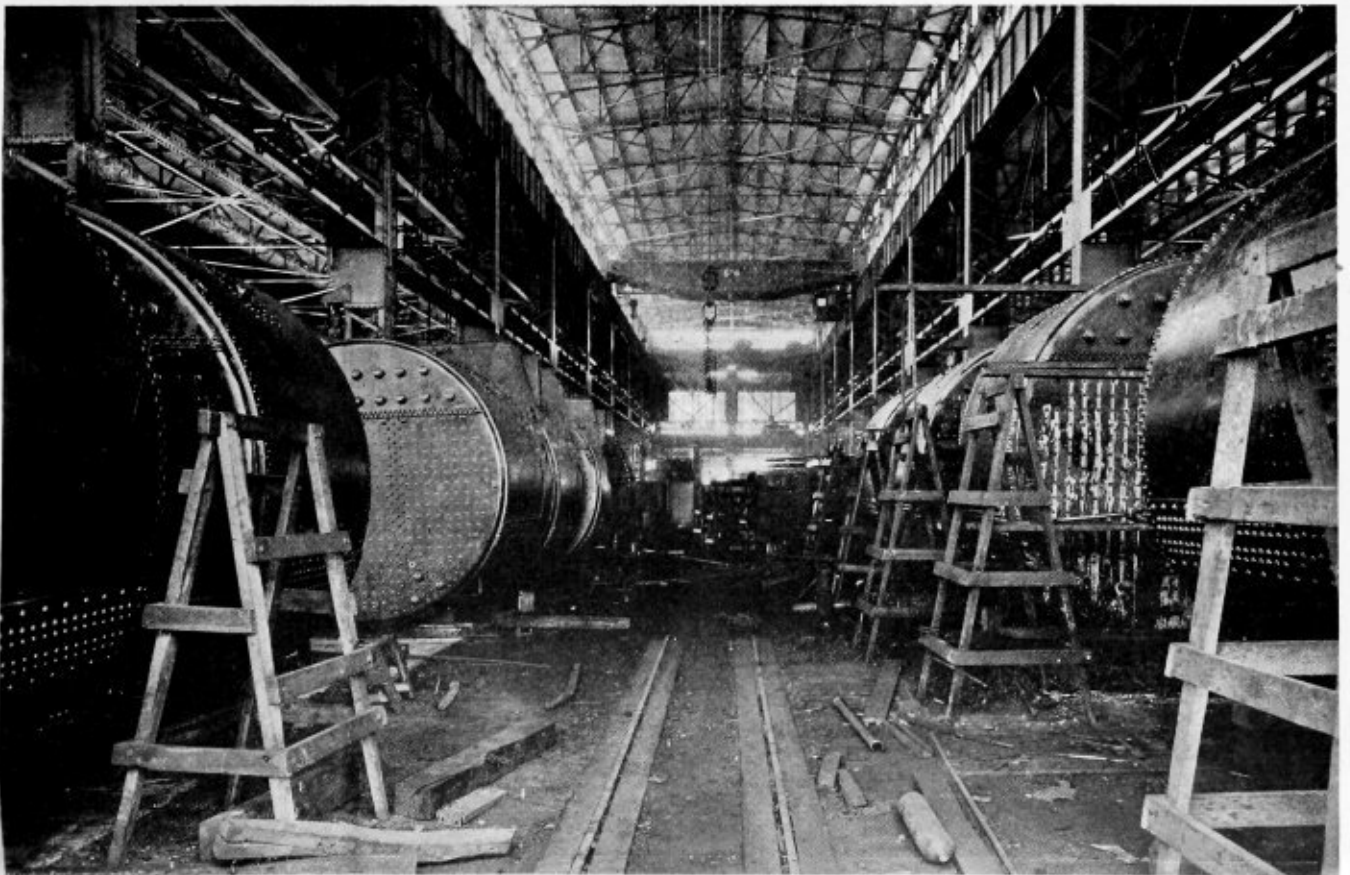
Eastern End of the Main Bay, Where Hydraulic Testing of Finished Boilers is Carried Out
